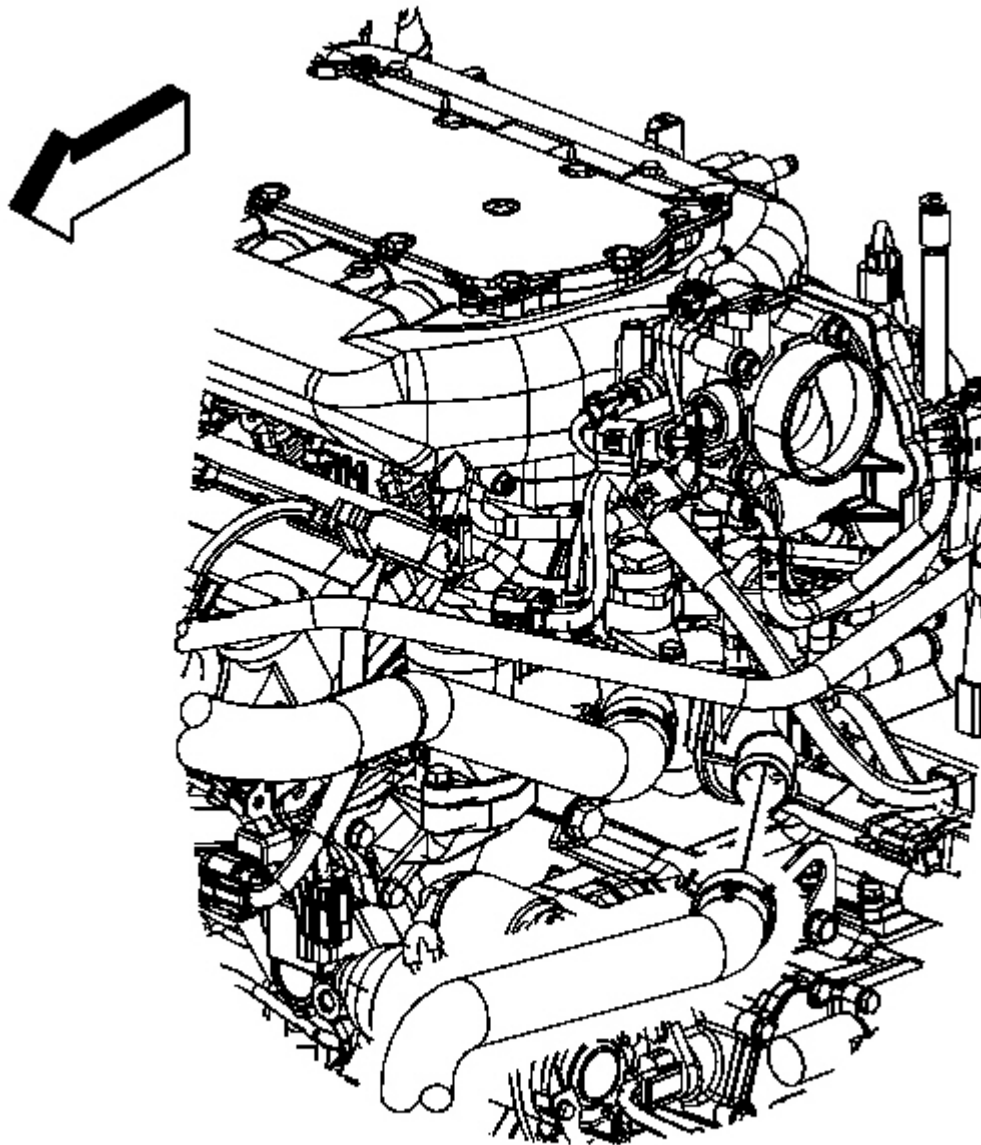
View Of Radiator Inlet & Outlet Hoses From The Engine
